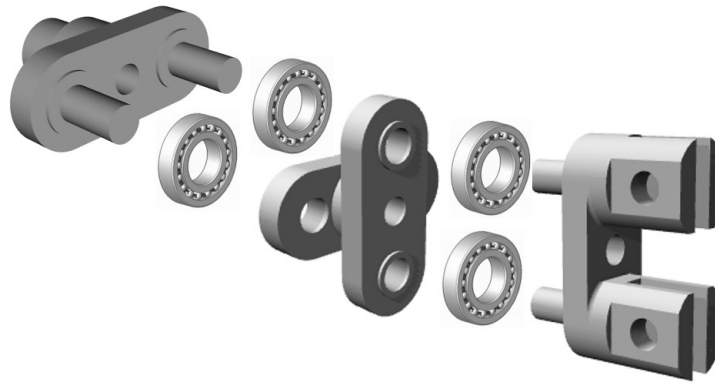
Exploded view of the follower arm assembly showing the implementation of bearings at the follower contact surfaces.
